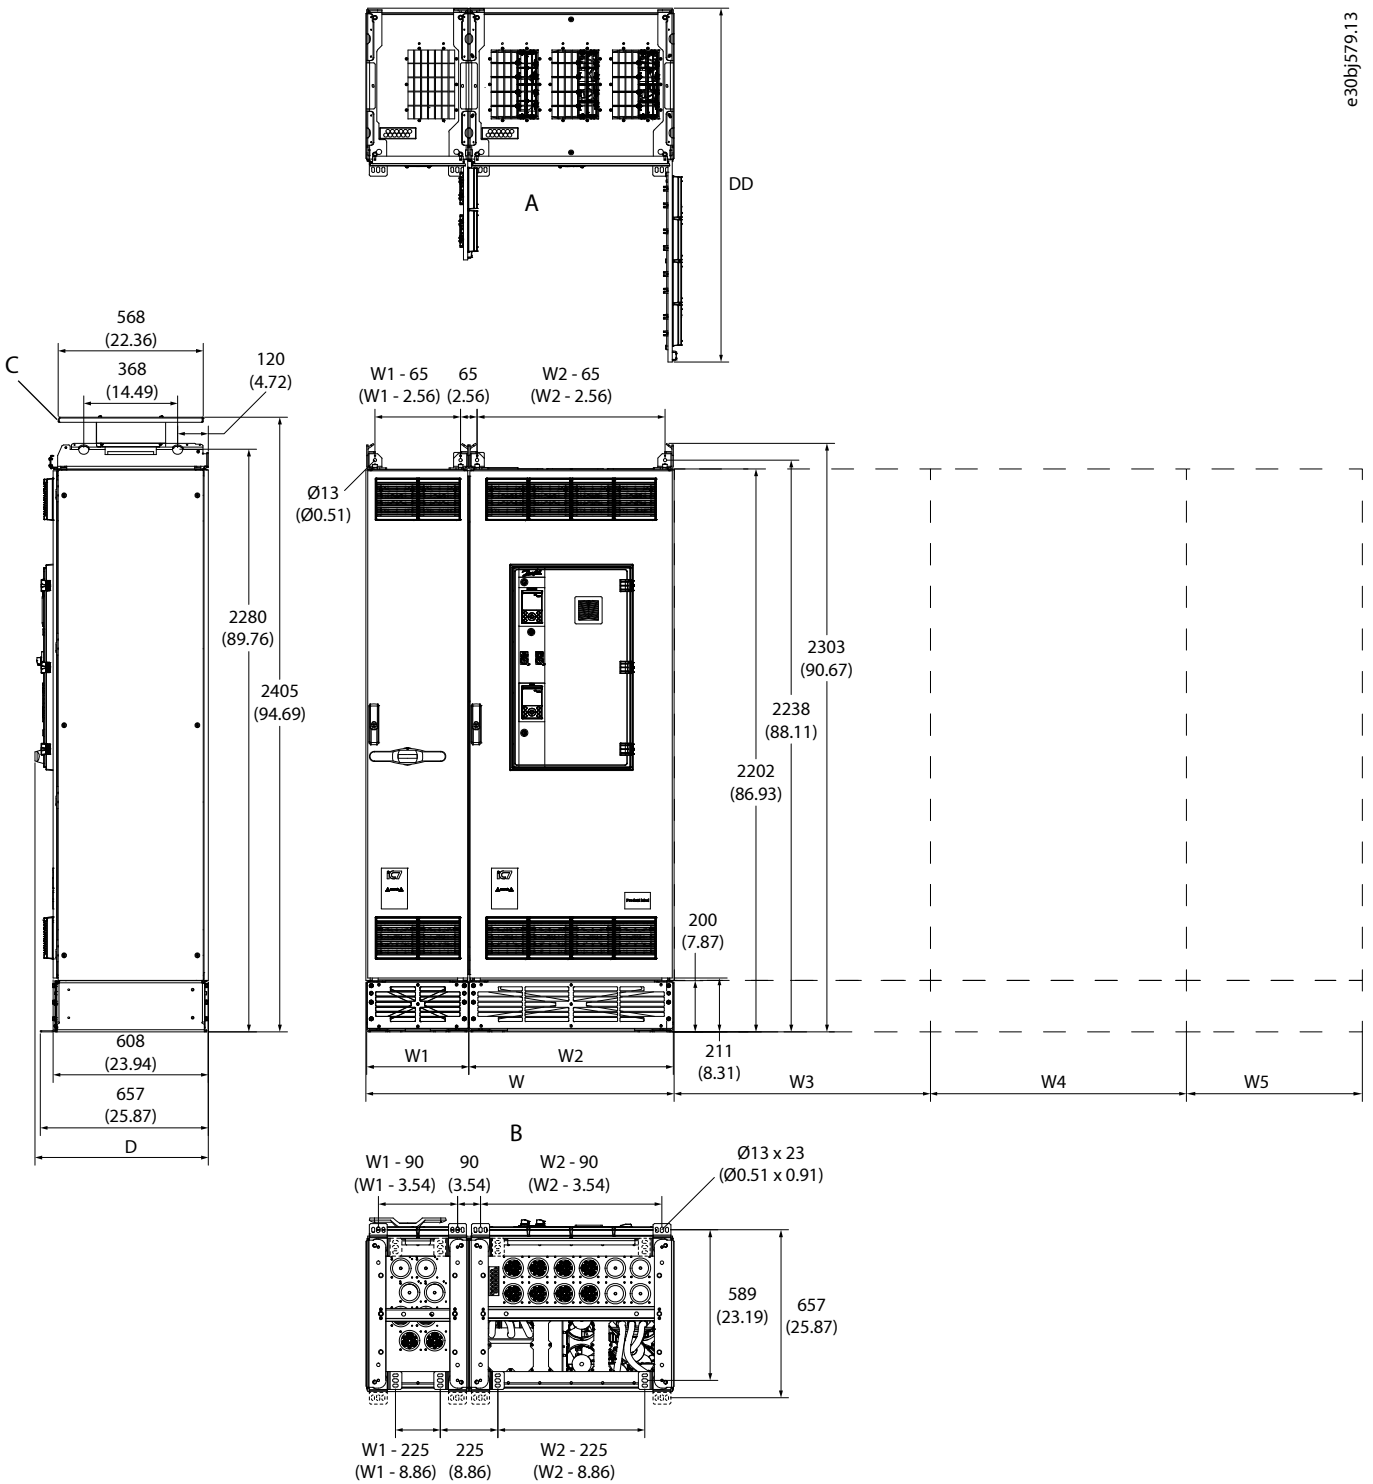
Dimensions of the Enclosed Drive, AE10, AE11, IE10, and IE11, in mm (in)
